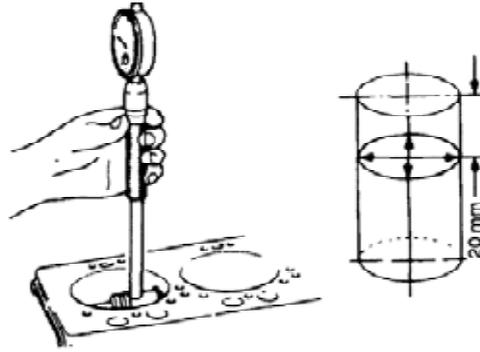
Measuring Camshaft Follower and Bore Wear
